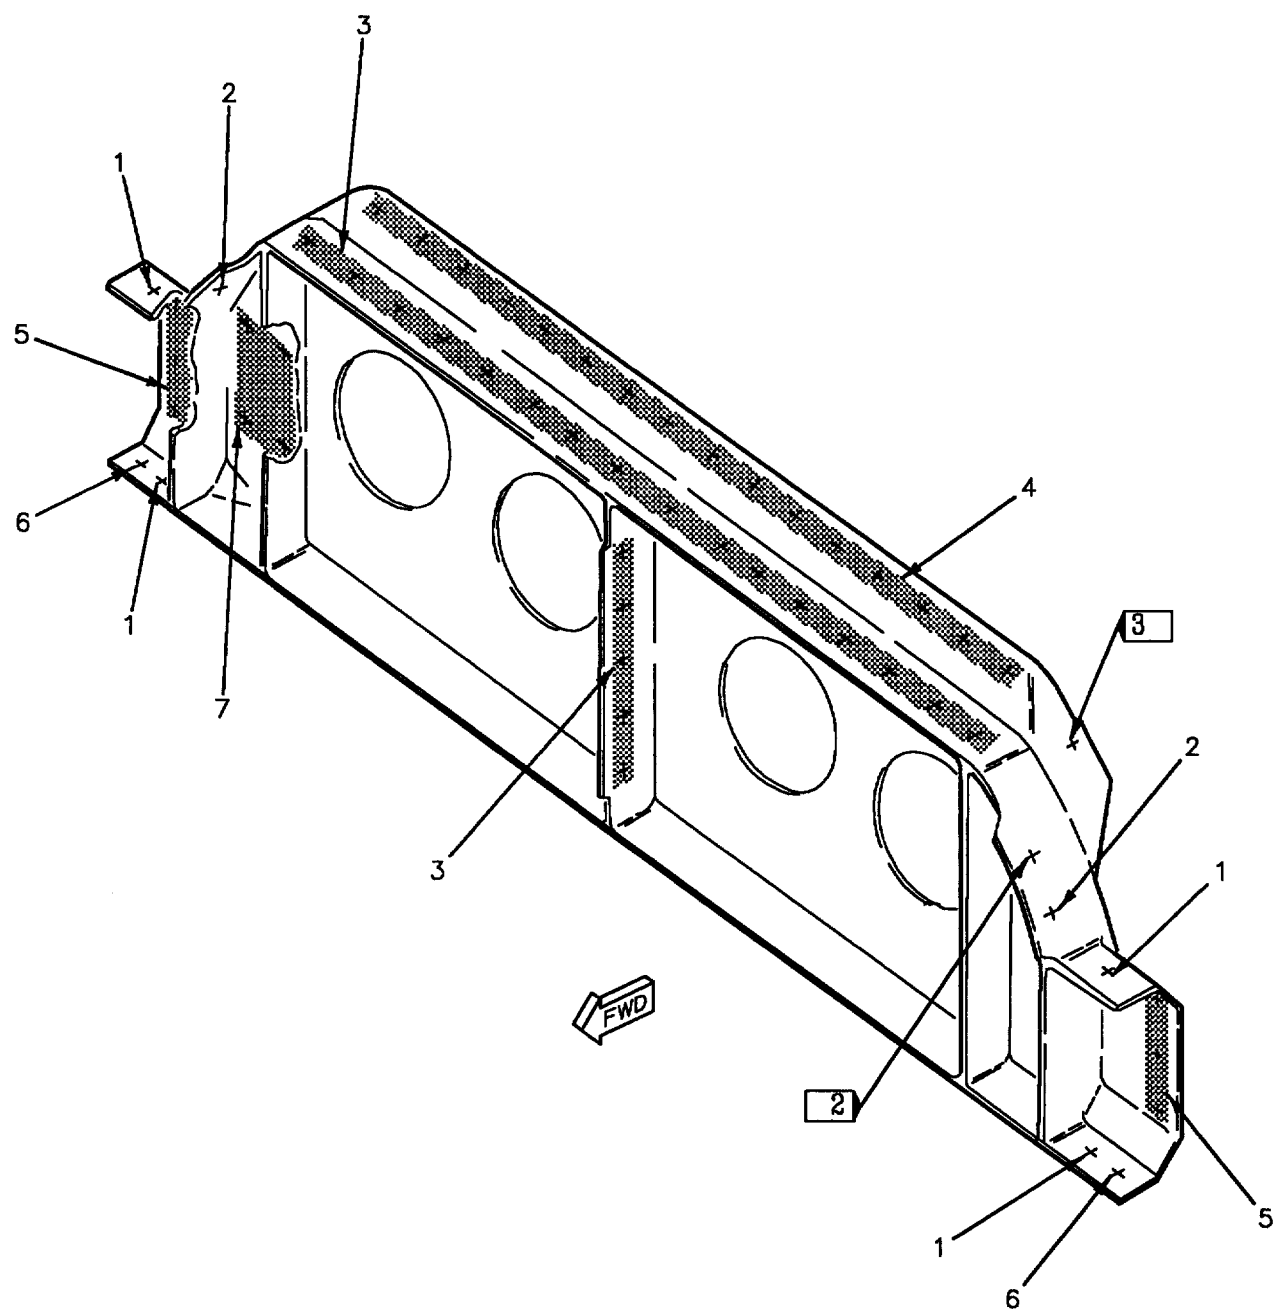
Aft Beam, 74A350735, Fastener Index (Sheet 1)
